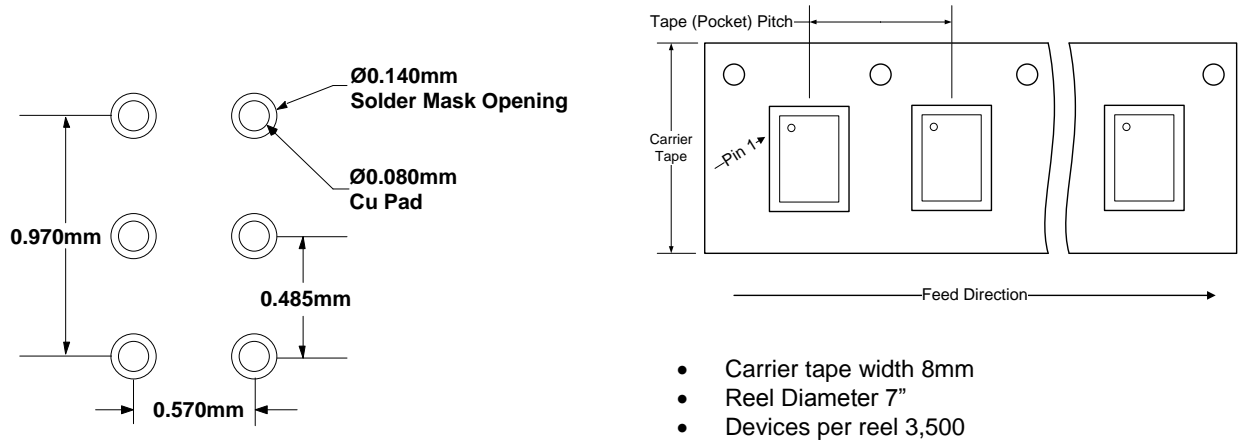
PCB Layout Footprint / Tape and Reel Information
